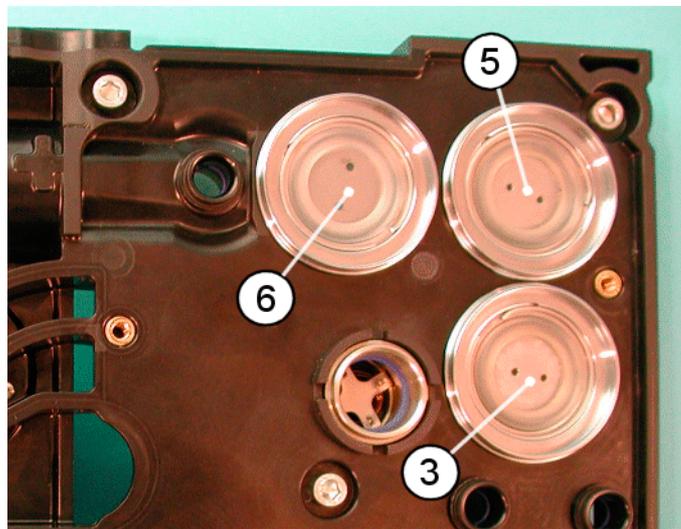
Flow (6), Spont (5), and Closed valve (3), old version
